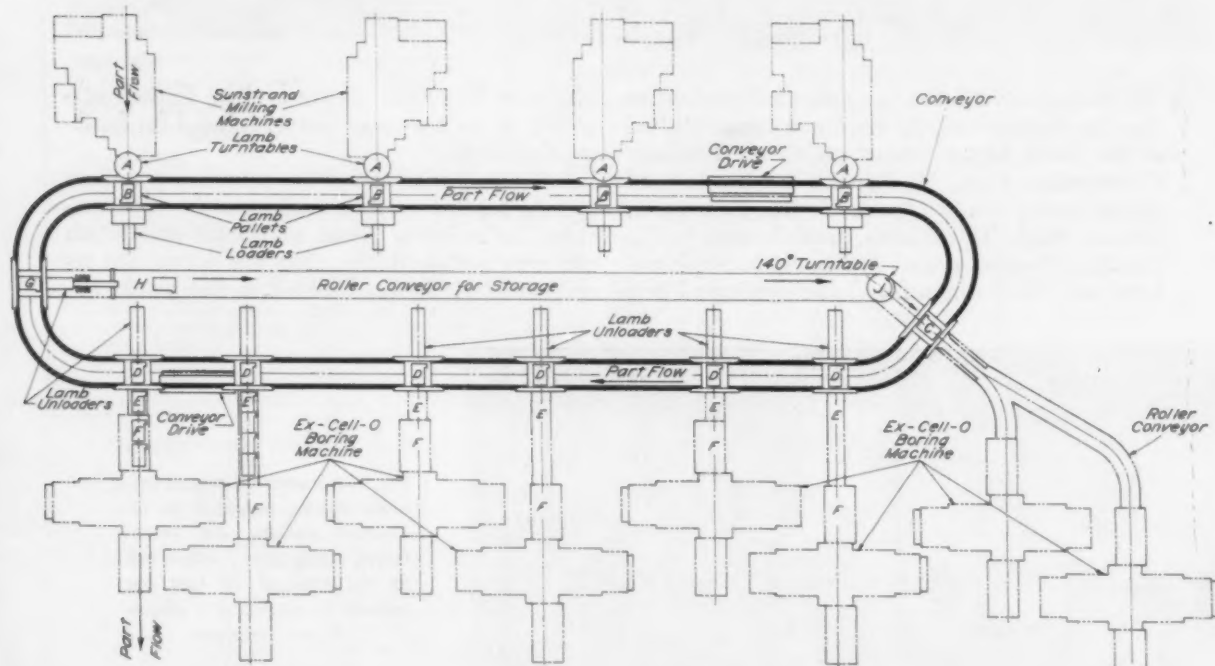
Schematic layout of a conveyORIZED pallet system for transferring cylinder blocks from the four milling machines seen at the top to eight boring machines shown along the bottom.
